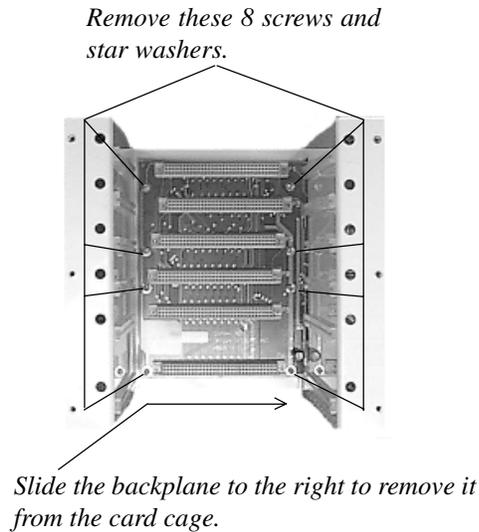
Removing the card cage from the electronics enclosure.
